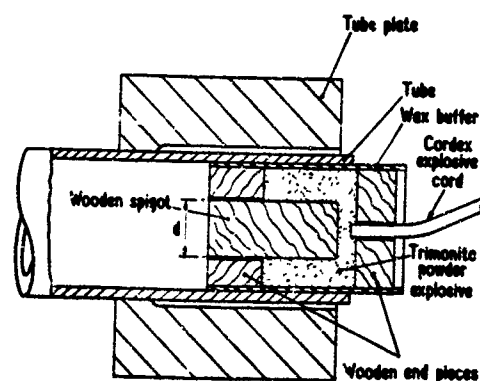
Explosive Pack for Simultaneously Welding a Number of Tubes to Tubeplate<sup>(4)</sup>.
